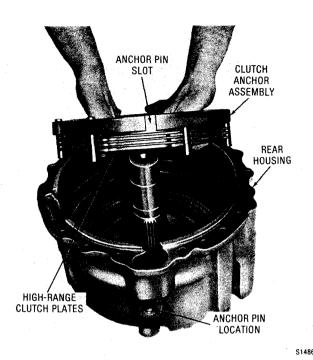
Installing assembled high-range clutch (TRT-3 overdrive)
